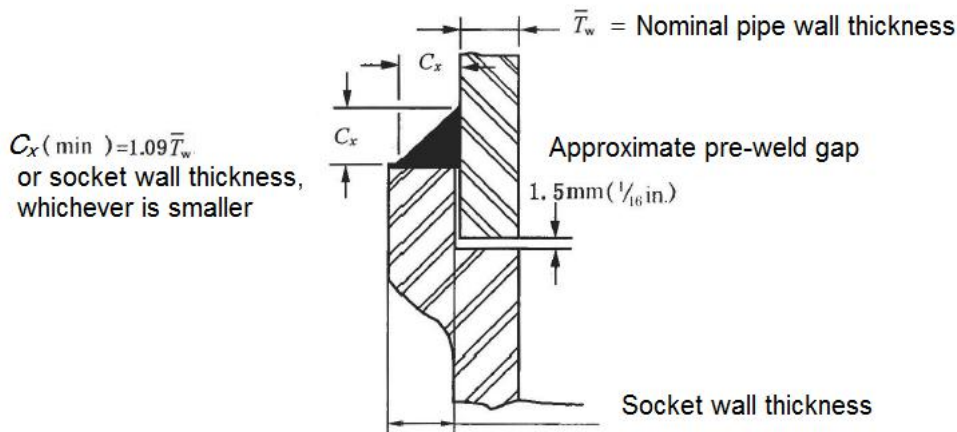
(2) Minimum weld size of socket welded assemblies other than flange
